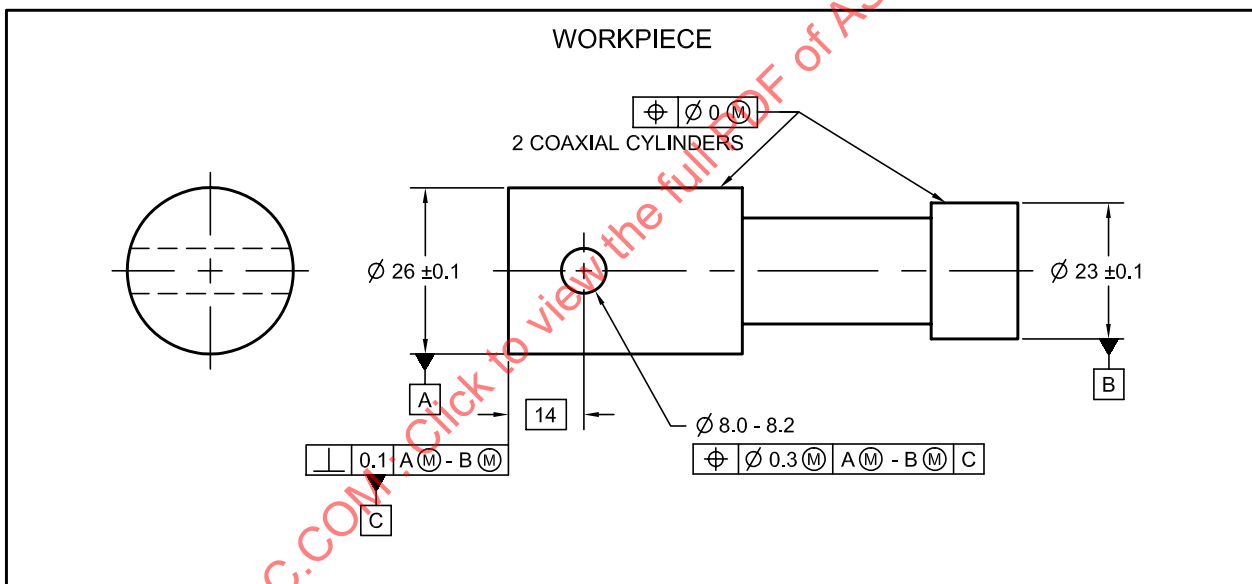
Two Datum Features, Single Datum Axis (Cont'd)
